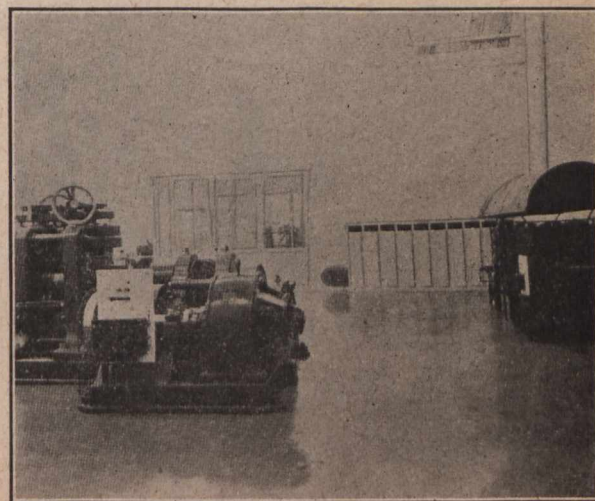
Breaking-down mill and fillet-annealing furnace.
